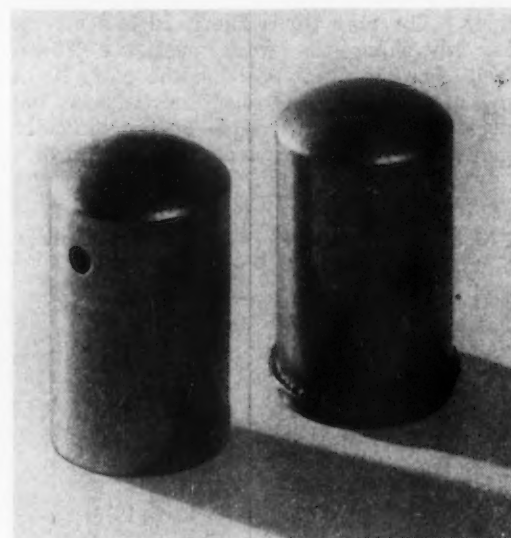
Cups are shown here as they appear before and after welding of the foot to the cup, and before any grinding is done.
